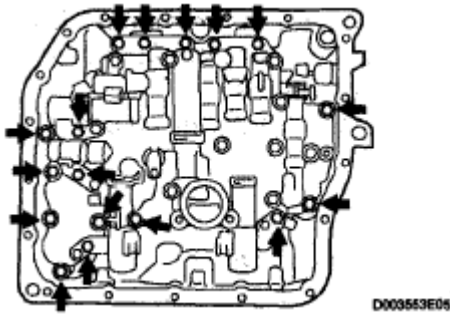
Locating Bolts Of Transmission Valve Body Assembly
